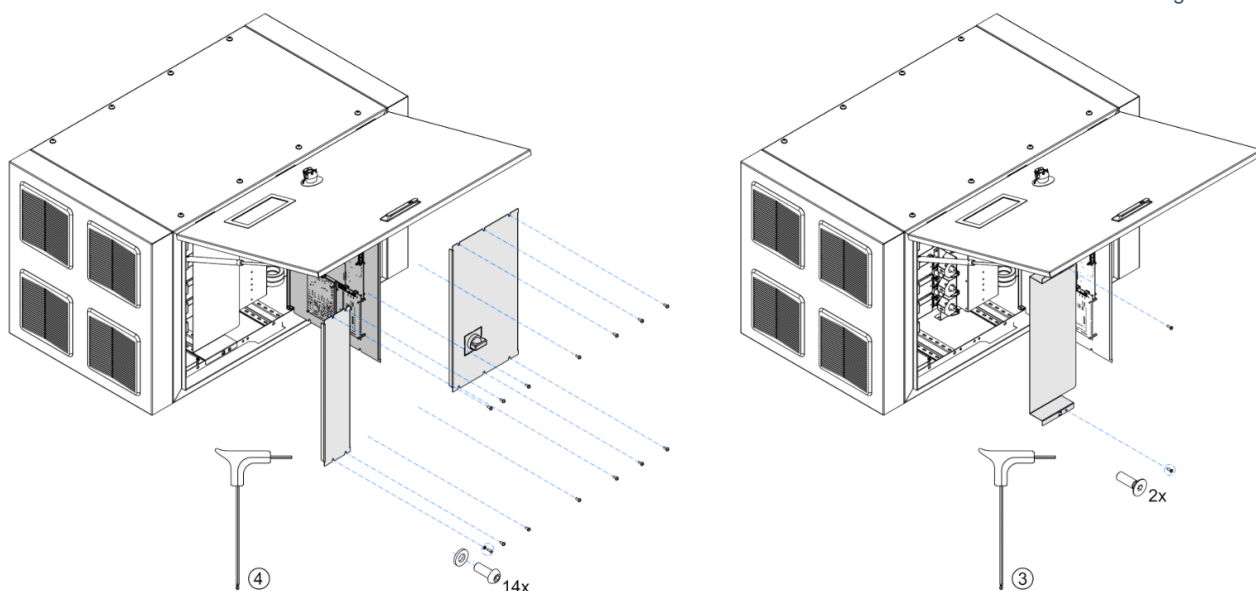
Remove front panels and IGBT protection (horizontal equipment)
